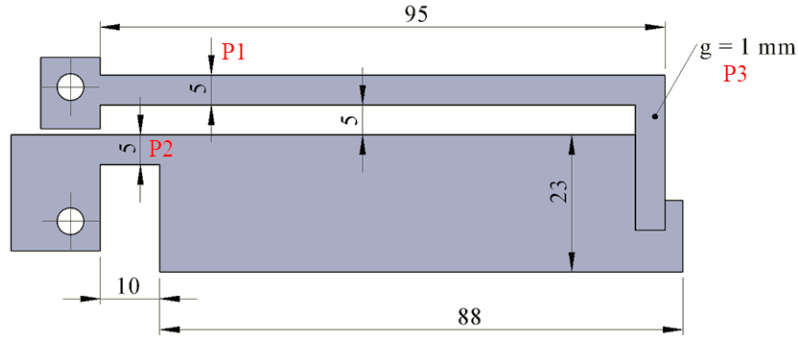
Geometrical model of the U-shaped hot-and-cold-arm actuator.
